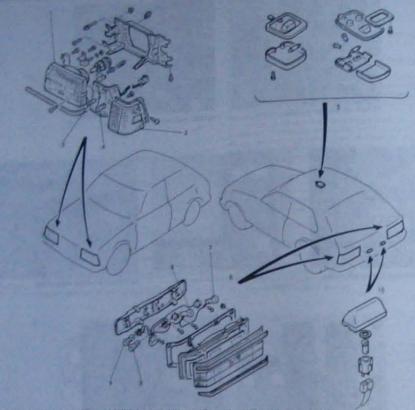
Exploded view of the vehicle lighting assemblies - pre-September 1985 models (Secs 13 to 15)
